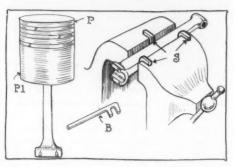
WEAR ON CROCKED PISTON AND METHOD OF LINING UP ROD
